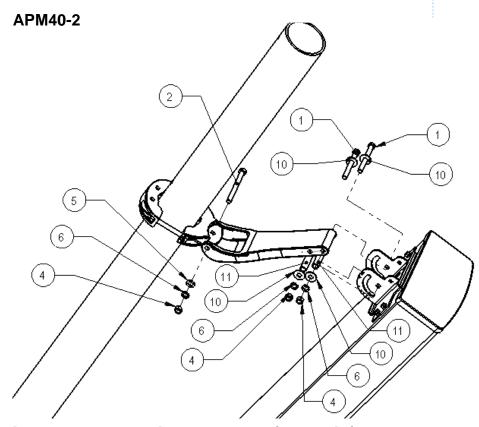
Beam Tilt Assembly (downtilt) Bottom mount assembly is the same as direct mount (Figure 3).
